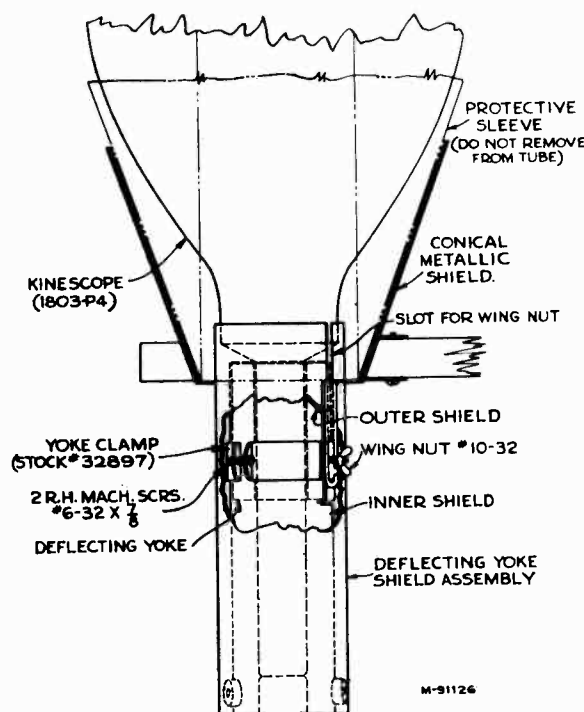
Assembly Details, Showing Kinescope and Deflecting Yoke Shielding
